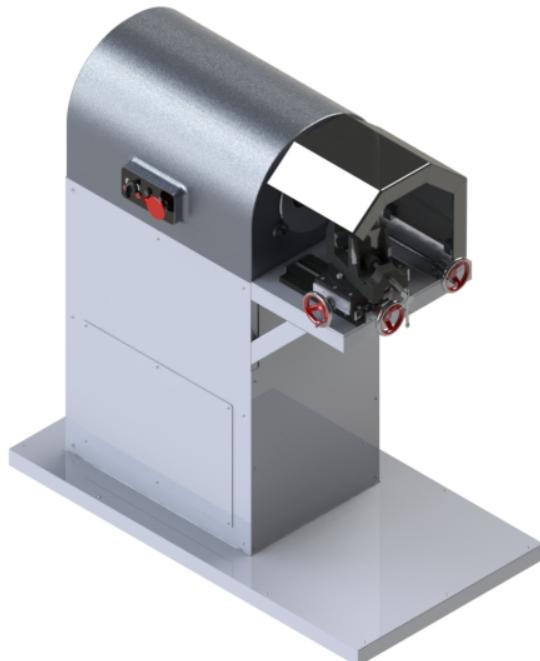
Full SolidWorks rendering of Cooper Machine Co's Tube Notcher
